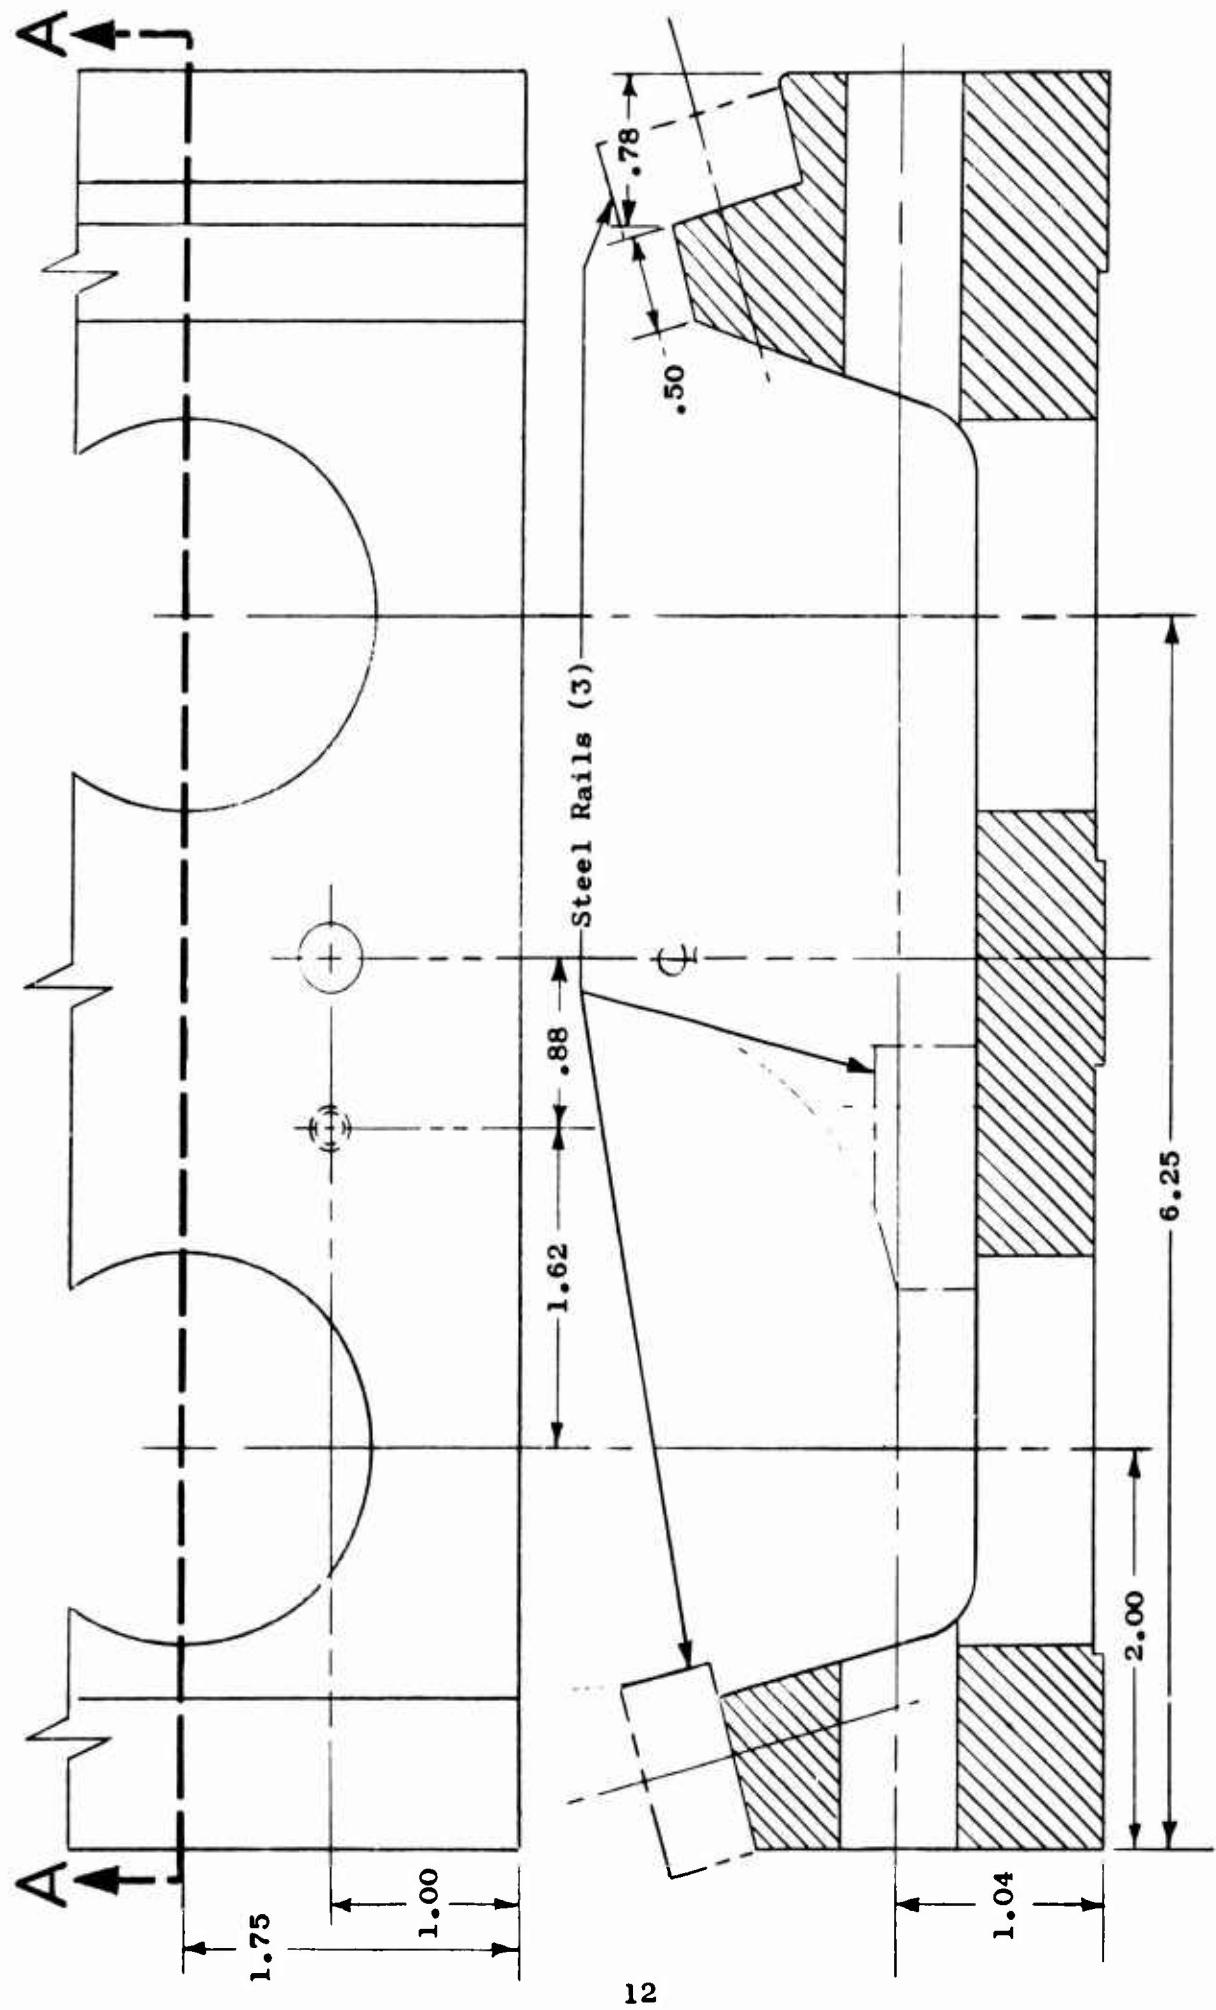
Stand Sub-Assembly, TD7-1076B, Sheet 2
